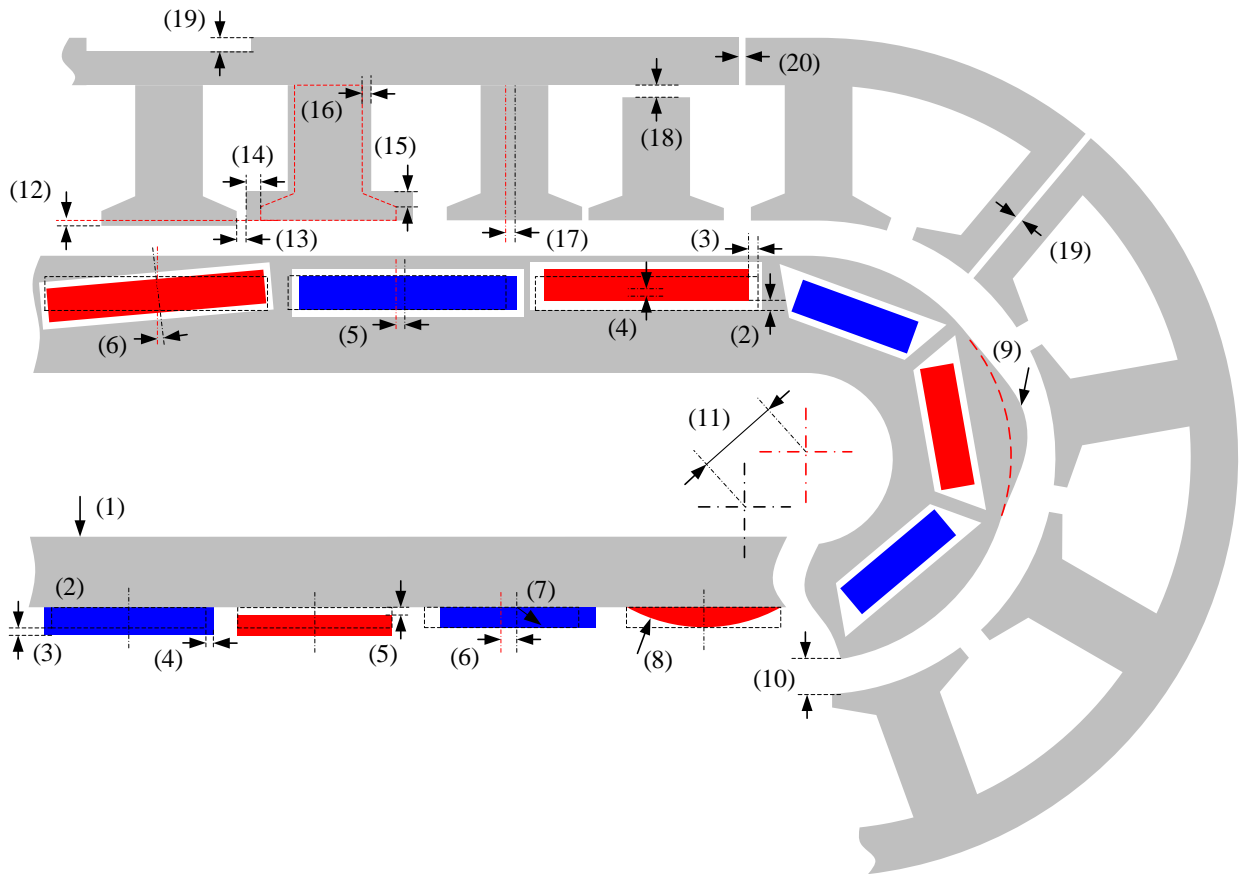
Manufacturing tolerances in PM machines.
